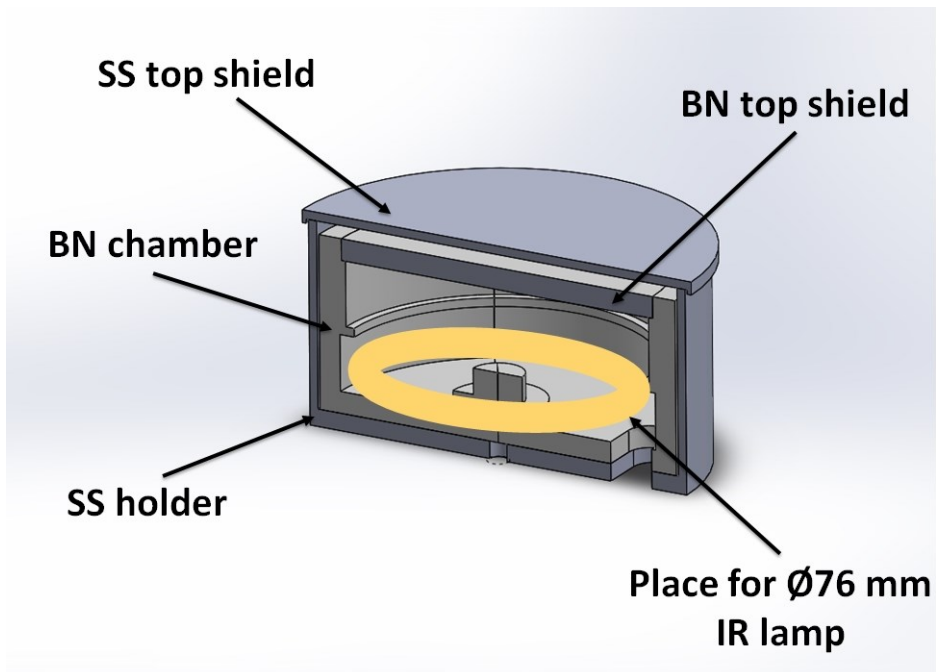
D76mm IR lamp driven vacuum brazing furnace design.
